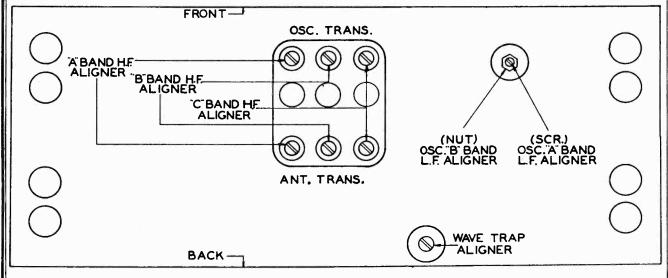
View Through Chassis Mounting Shelf Showing Adjusting Screws for R. F. Aligning Capacitors.
